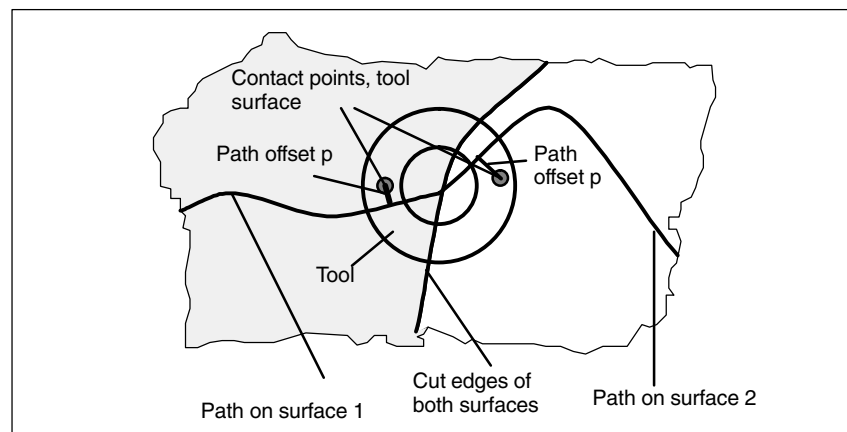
Inner corner with face milling (view in direction of longitudinal axis of tool)
